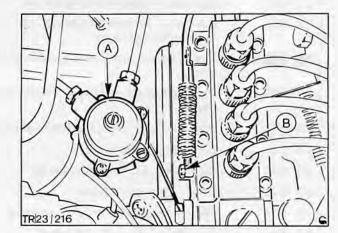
Fuel injection pump A - Fuel lift pump B - Pump bleed bolt
